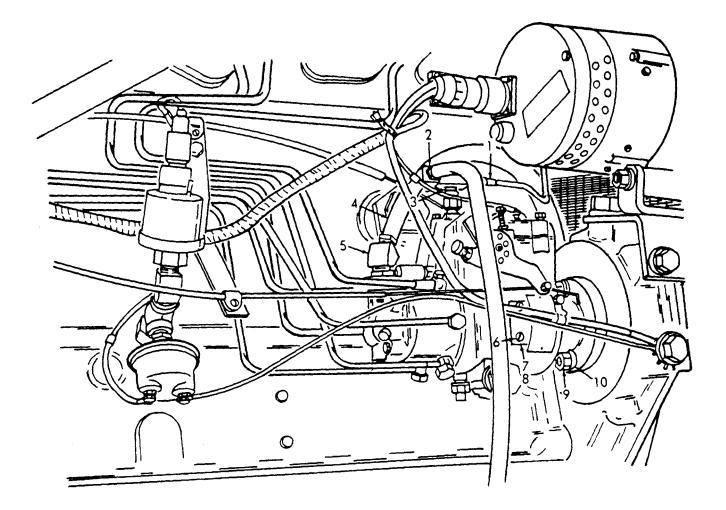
Fuel Injection Pump, Removal and Installation.
